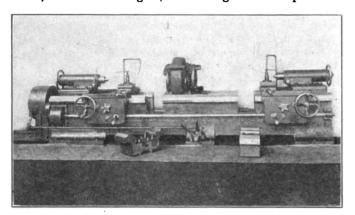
The Machine Ready to be Used for Turning Journals with the Wheels Mounted on the Axle
